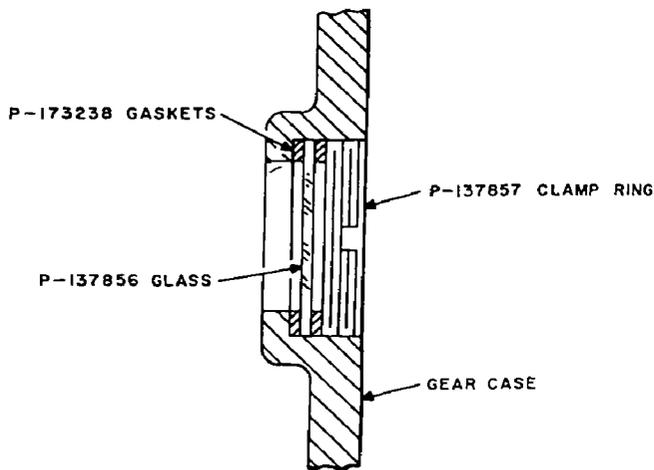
Type of Oil Sight Used on Early 1- and 2-Type Interrupter Mountings
